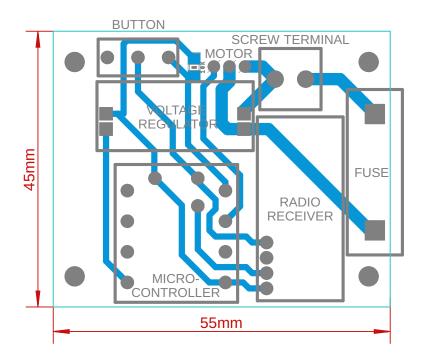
Binding circuit board rendering created with Autodesk Eagle. The pins of the microcontroller, voltage regulator, radio receiver, fuse, button, motor, screw terminal and resistors are connected as shown in Schematic 22. The edges of the components, as well as the solder pads, are shown in gray, the connections between them in blue. The outline of the board is light-blue, and its dimensions are shown in red.
